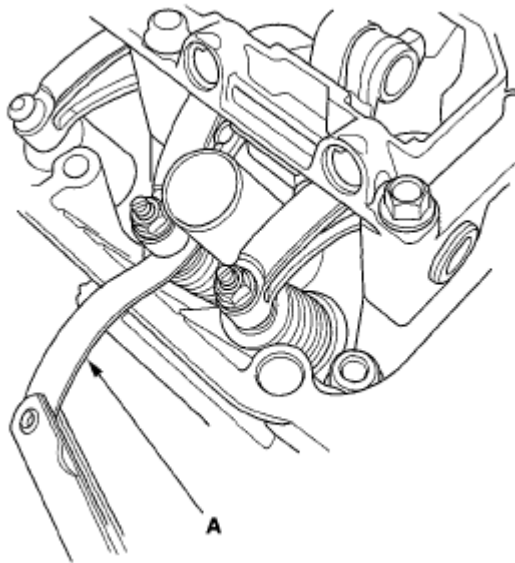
Inserting Feeler Gauge Between Adjusting Screw And End Of Valve Stem - Exhaust
